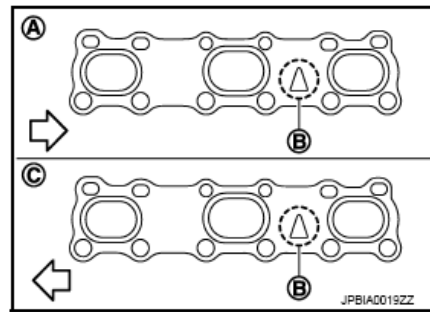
Identifying Exhaust Manifold Gasket Triangle Press
